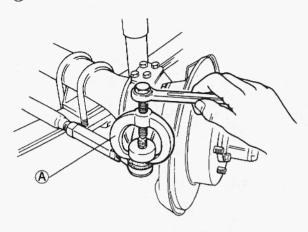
(A) Special tool (Tie rod end remover 09913-65210)
